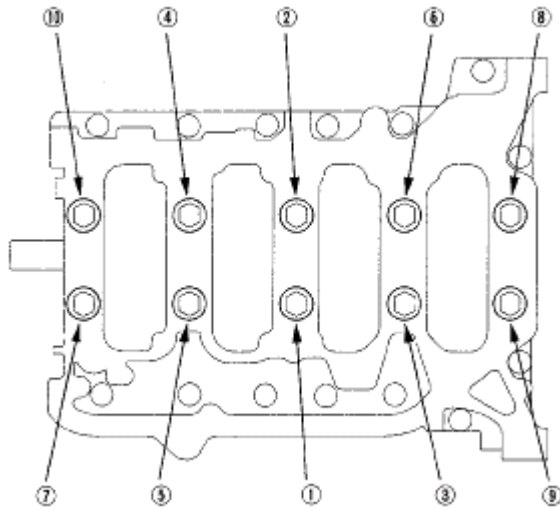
Identifying Crankshaft Bolt Tightening Sequence
